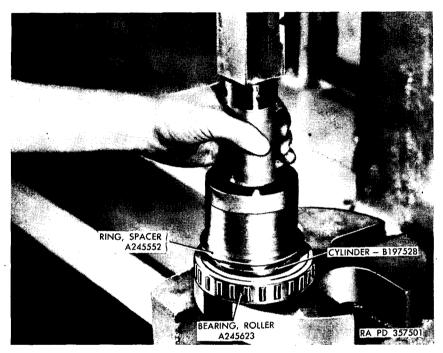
Pressing spacer ring onto shaft with cylinder and piston assembly.
